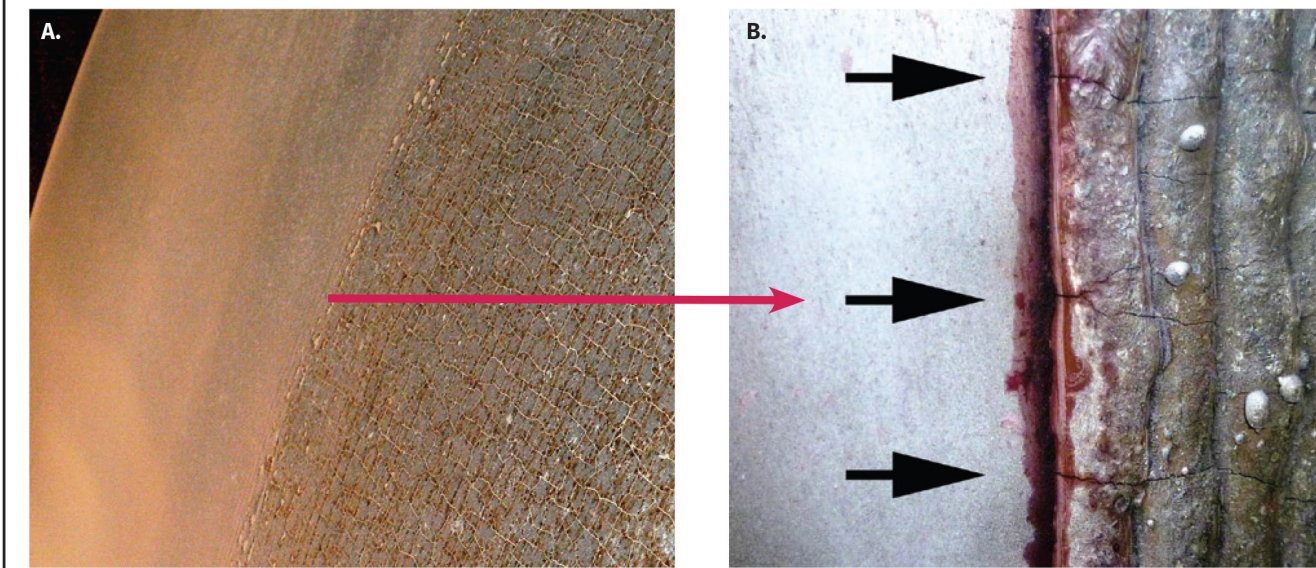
hardfacing high-chromium white iron by means of welding is a successful technique when properly applied. A: a conical tyre with accurate geometry after successful operation. B: close-up of hardface edge after dye-penetrant testing; with the correct welding conditions, the check cracks are formed in the hardface metal, but they do not propagate into the base
